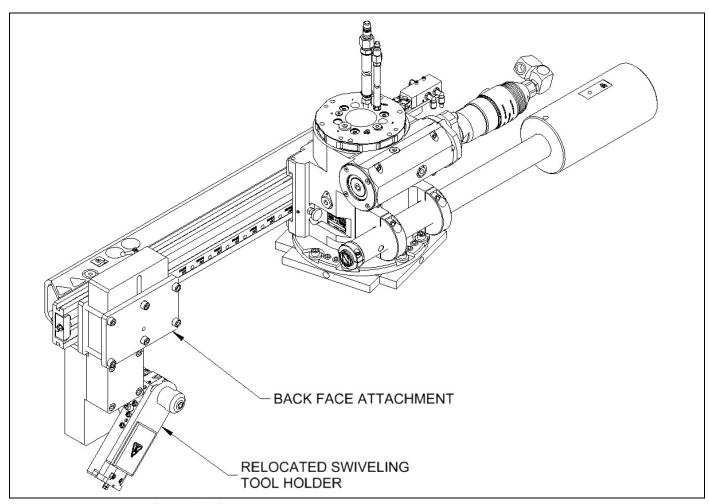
BACKFACING ATTACHMENT ON SURFACE MOUNT MACHINE
